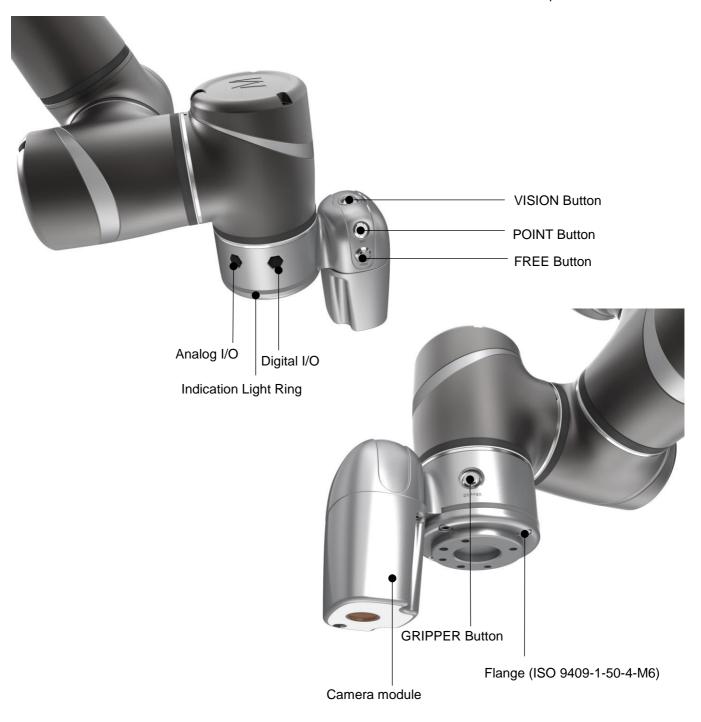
References of TM5-700/ TM5M-700/ TM5-900 / TM5M-900 End Module Components
